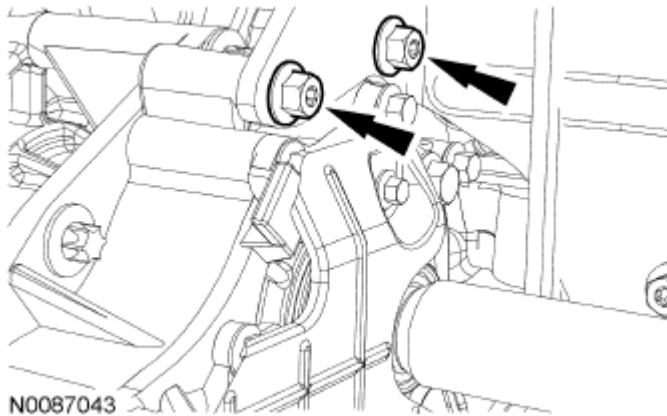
Locating RH Engine Bracket-To-Power Transfer Unit Bolts
